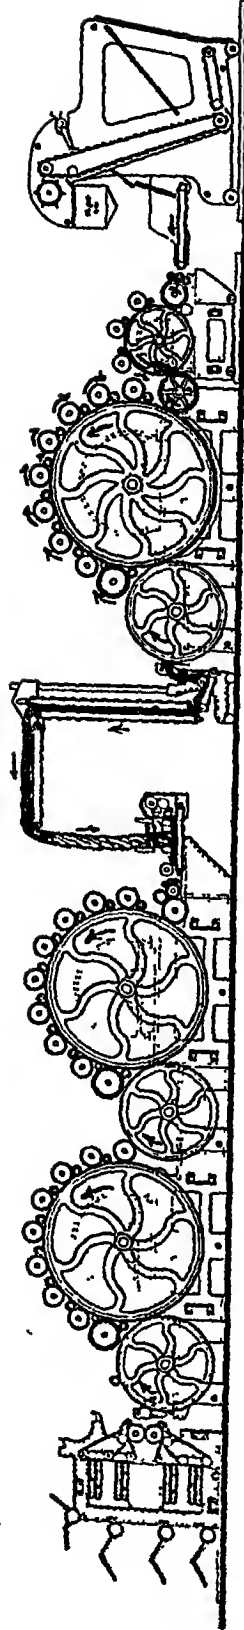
Three-card woolen set with center-draw ribbon transfer, automatic feeder, and condenser Courtesy Whitin Machine Works
